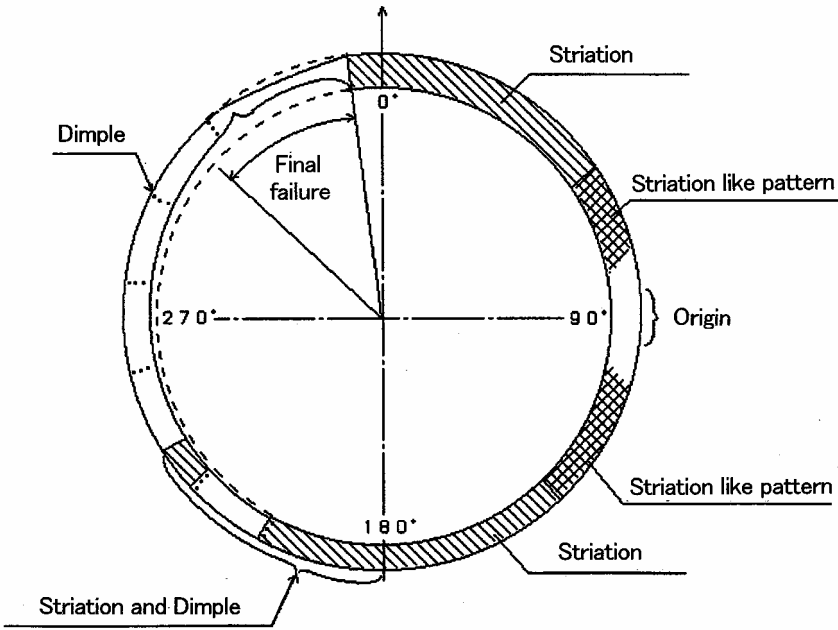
Morphology of fracture surface of the SG tube.
